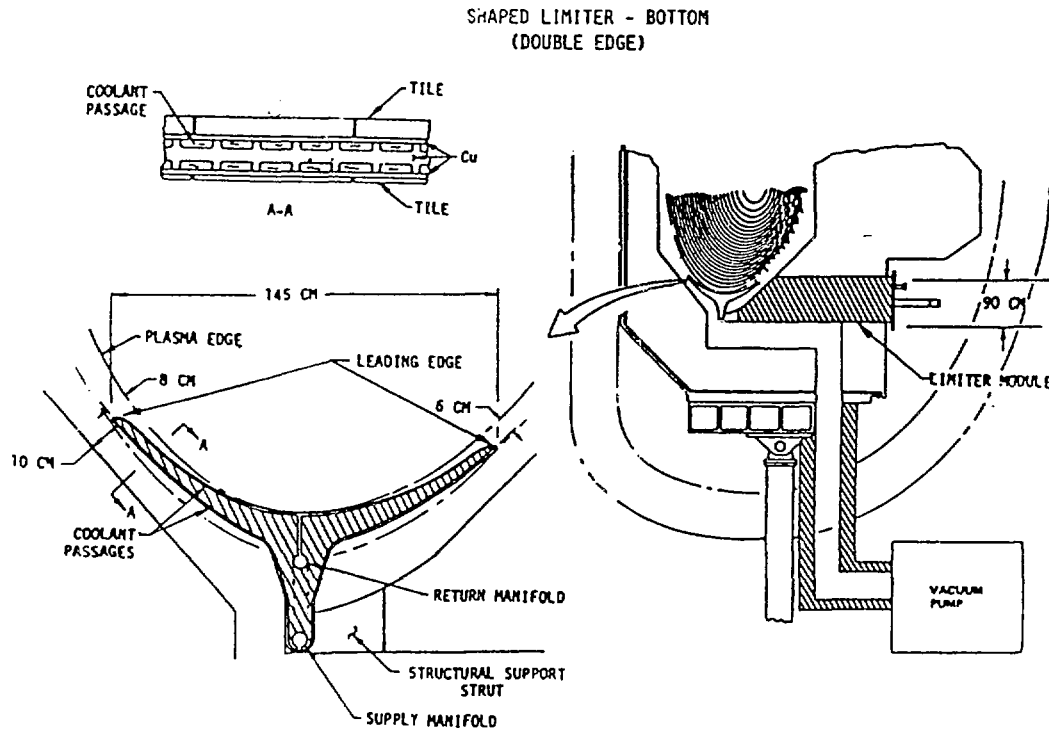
Geometry and dimensions of double-edged bottom limiter
